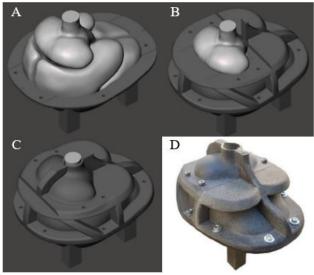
Brain moulds. (A) First and lower layer, (B) second and middle layer, (C) third and upper layer, and (D) 3D printed PA12 moulds for IHHS 3.0, 4.0, and 5.0.
